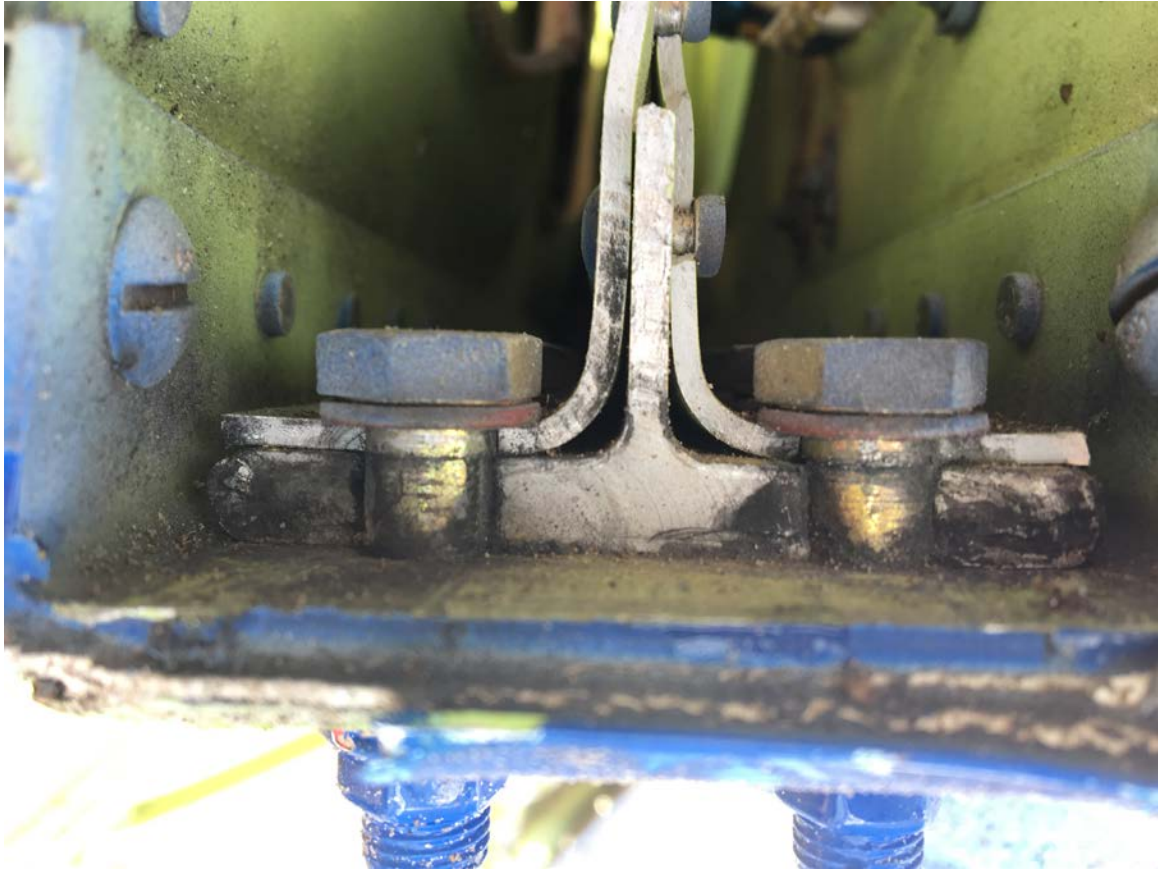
N106ER Left wing lower spar cap fracture face, looking inboard
